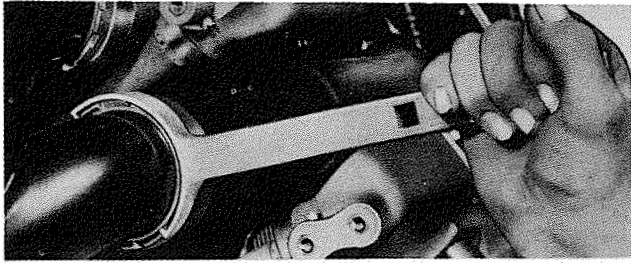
Loosening Front to Rear Intake Pipe Connection Nut
